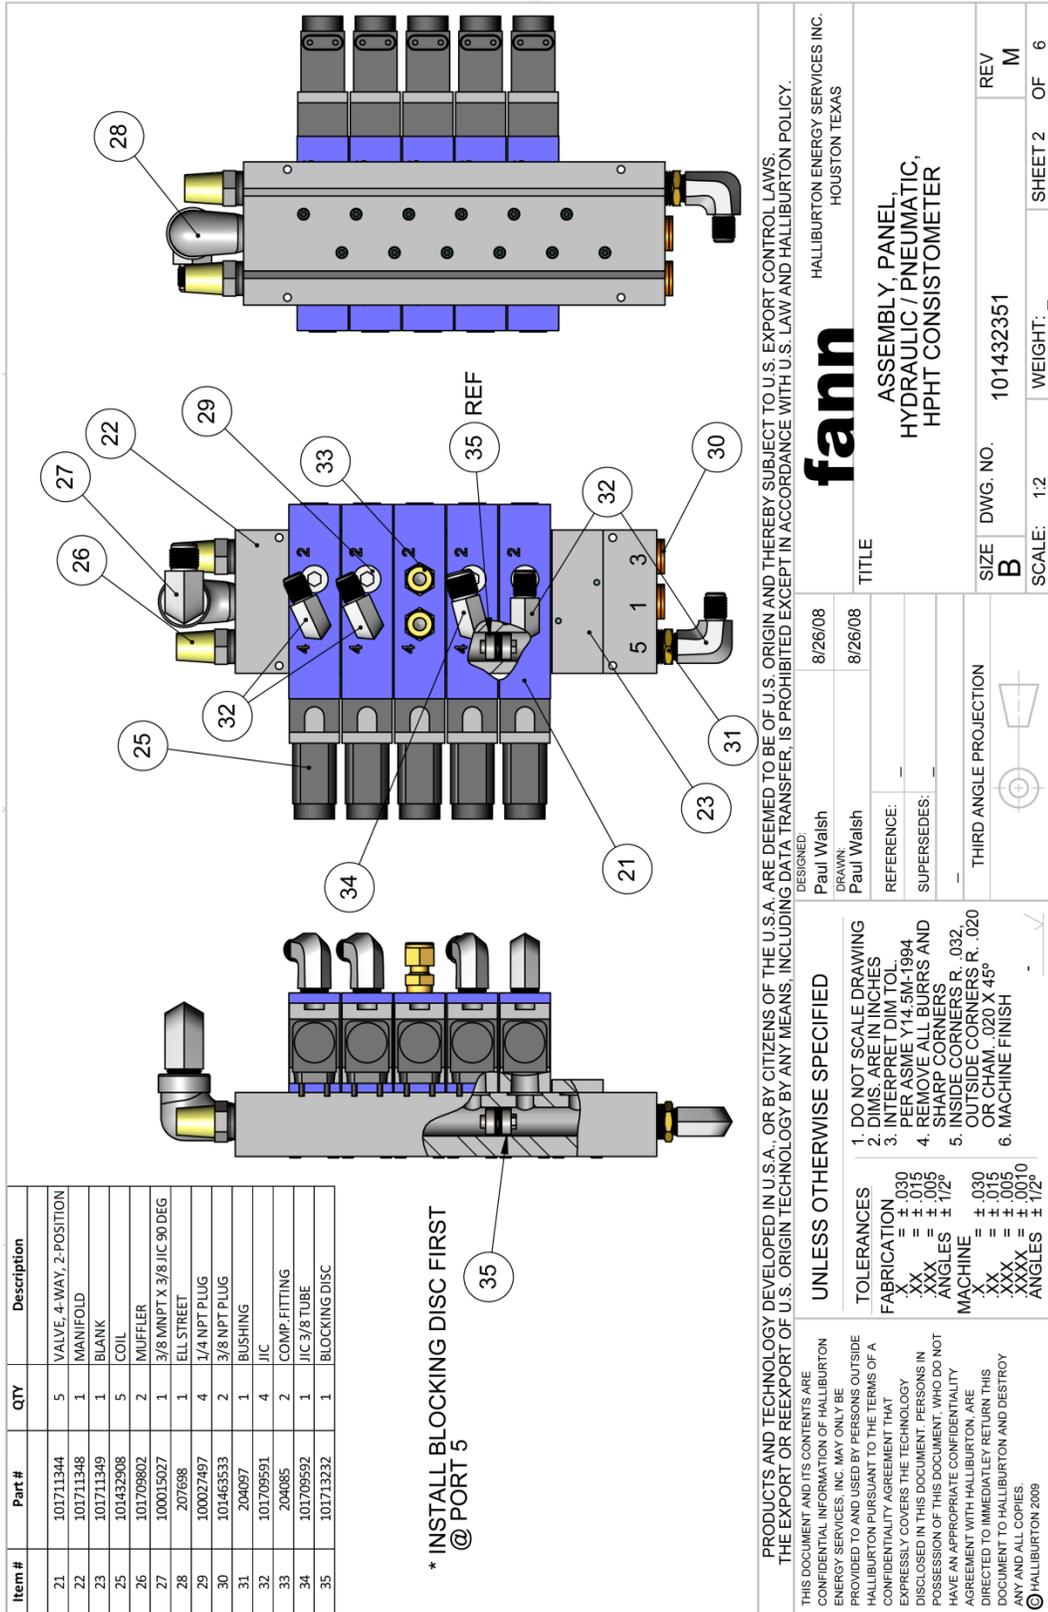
Hydraulic/Pneumatic Panel Assembly, 2/6
